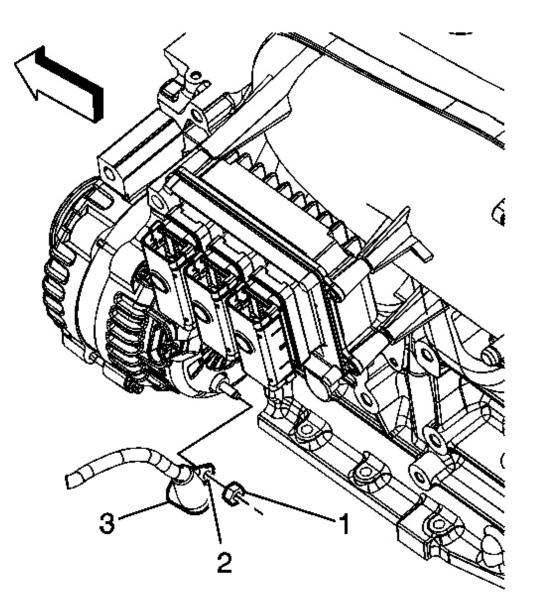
View Of Positive Battery Cable Boot Courtesy of GENERAL MOTORS CORP.
